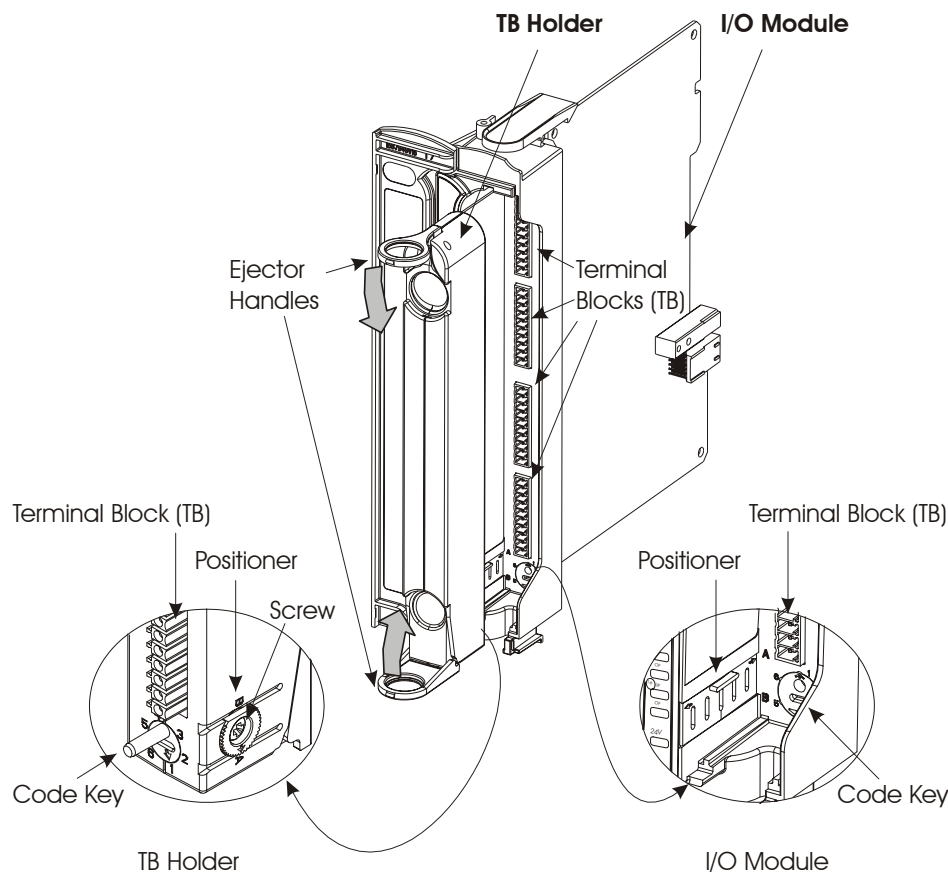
Terminal Block (TB) Holder on I/O Module – General View with Coding
